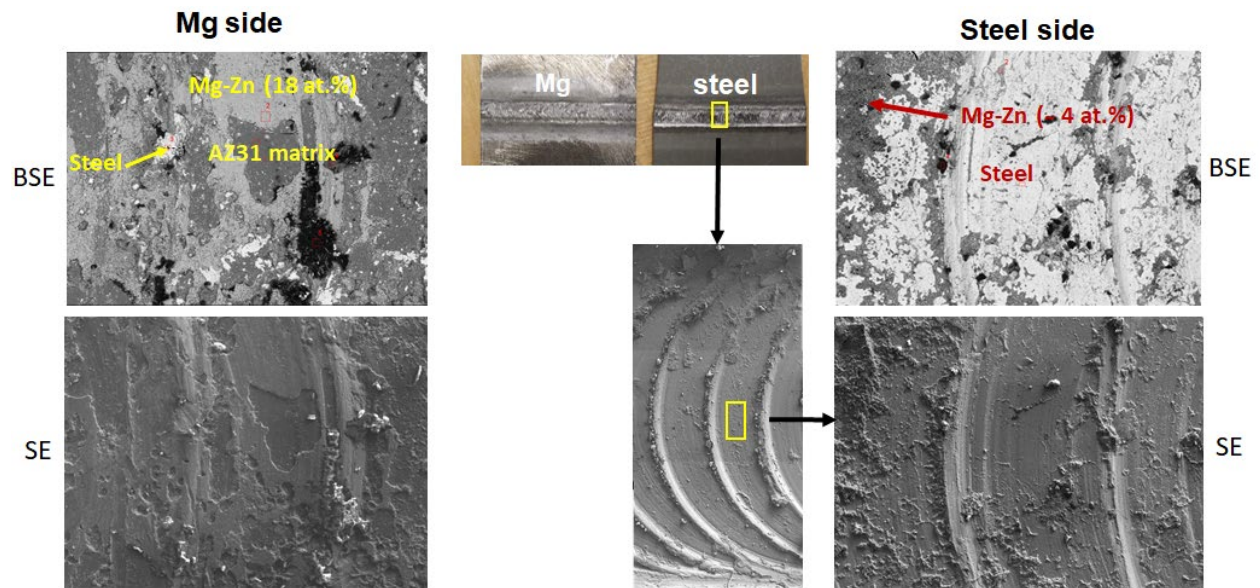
B.6. Friction stir scribe joint fracture surface. Back-scattered and secondary images of Mg and Steel side show elemental and topography of the fracture. Source: PNNL.
